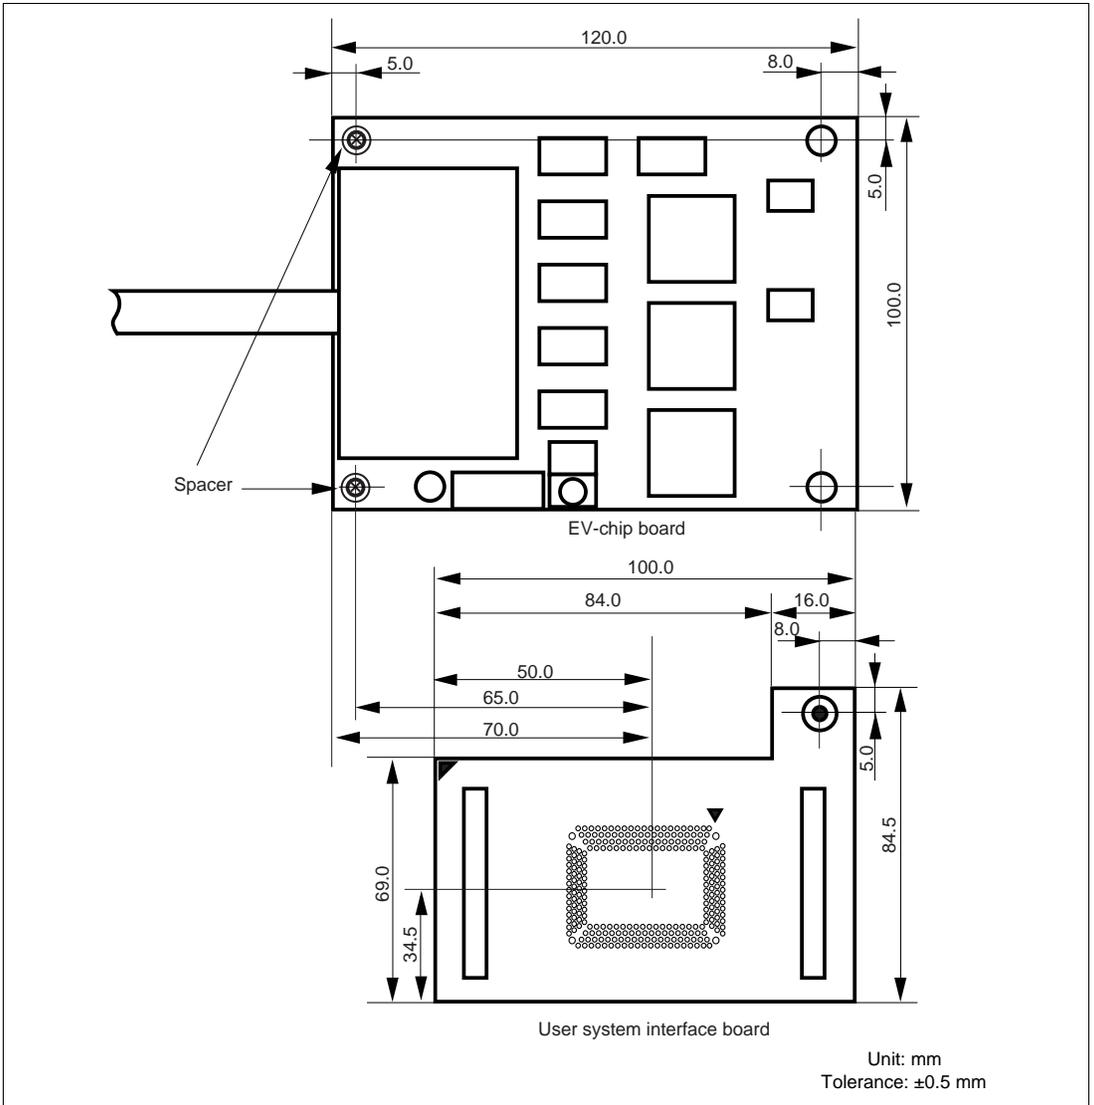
Dimensions for EV-Chip Board and User System Interface Board
